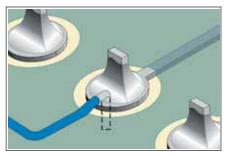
Acceptable Wire soldered into plated-through hole on solder side.
